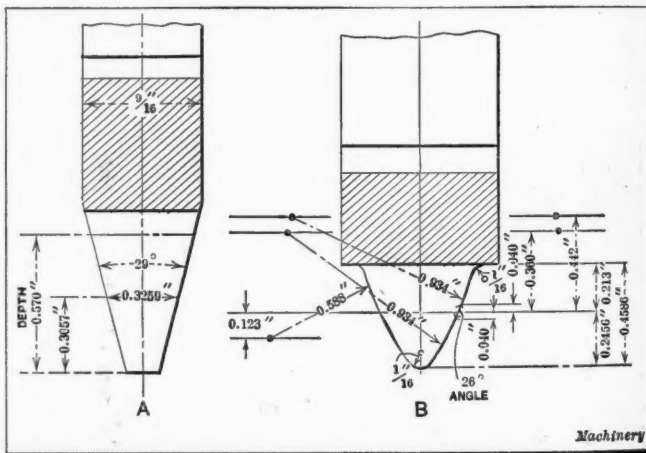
A, Cutter for Gear No. 2; B, Cutter for Gear No. 3
